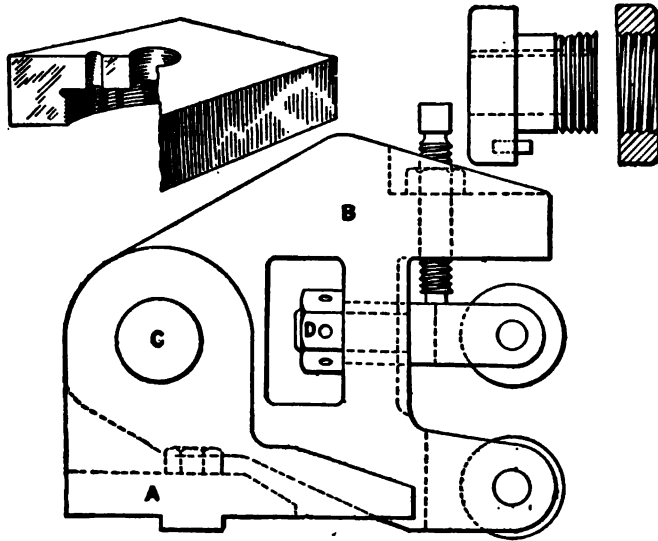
FIXTURE, DRILL JIG AND ROLL HOLDER
